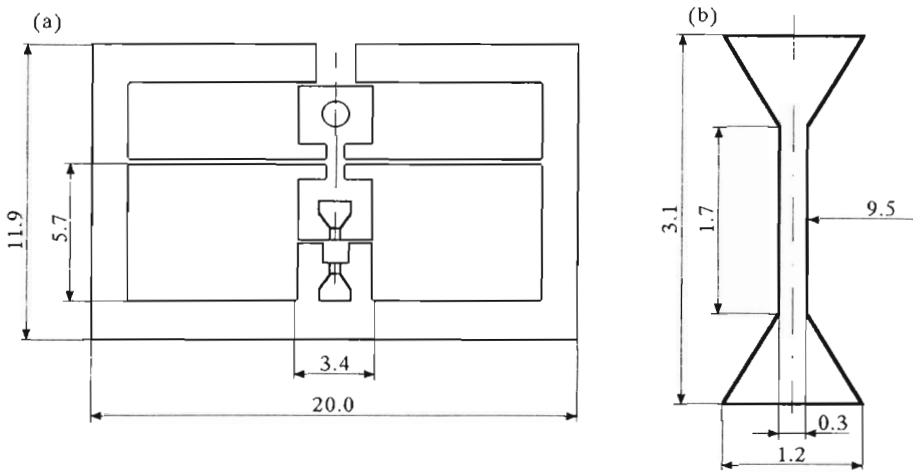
Drawings of: (a) the teste machine load frame (dimensions are in milimeters), (b) the flat "dog bone" specimen
